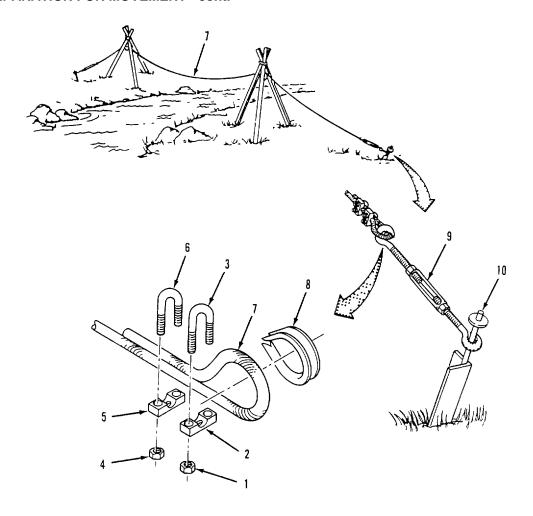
Wire Rope and Turnbuckle Disassembly
